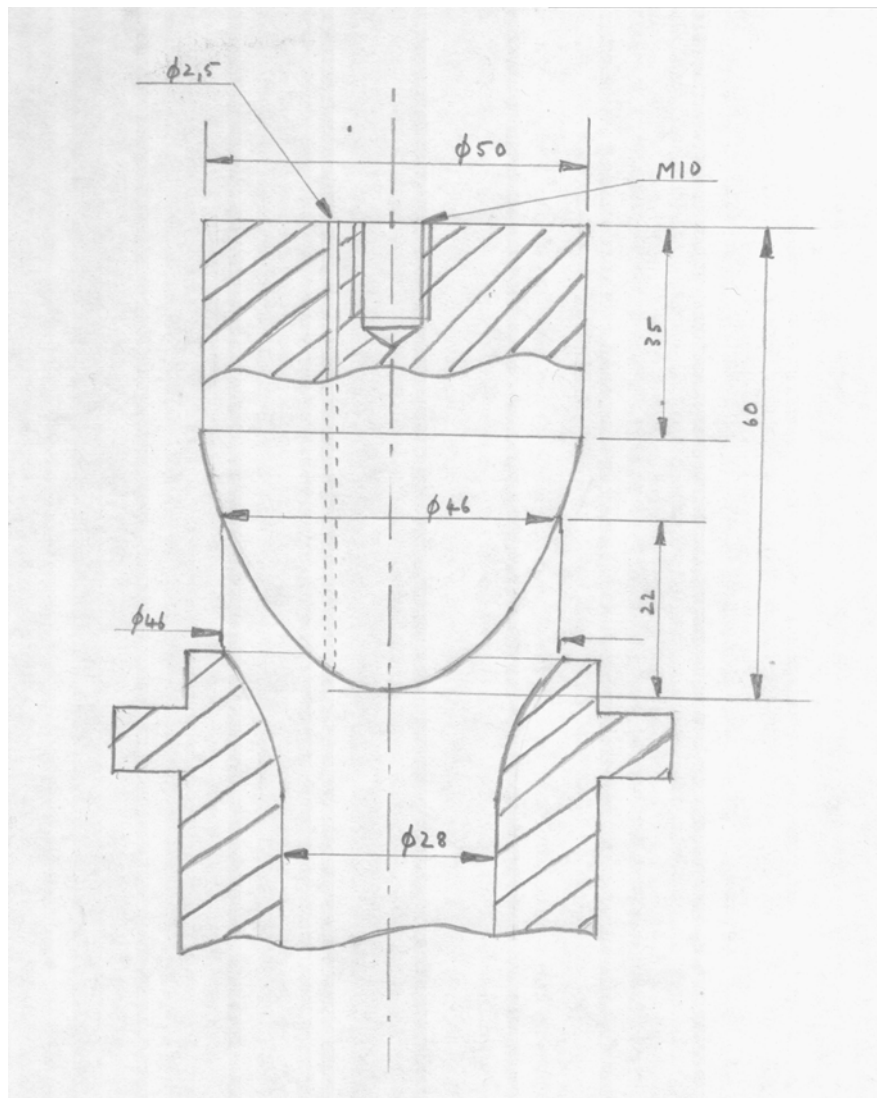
Assembly drawing of 40%-scaled stopper and SEN upper part
